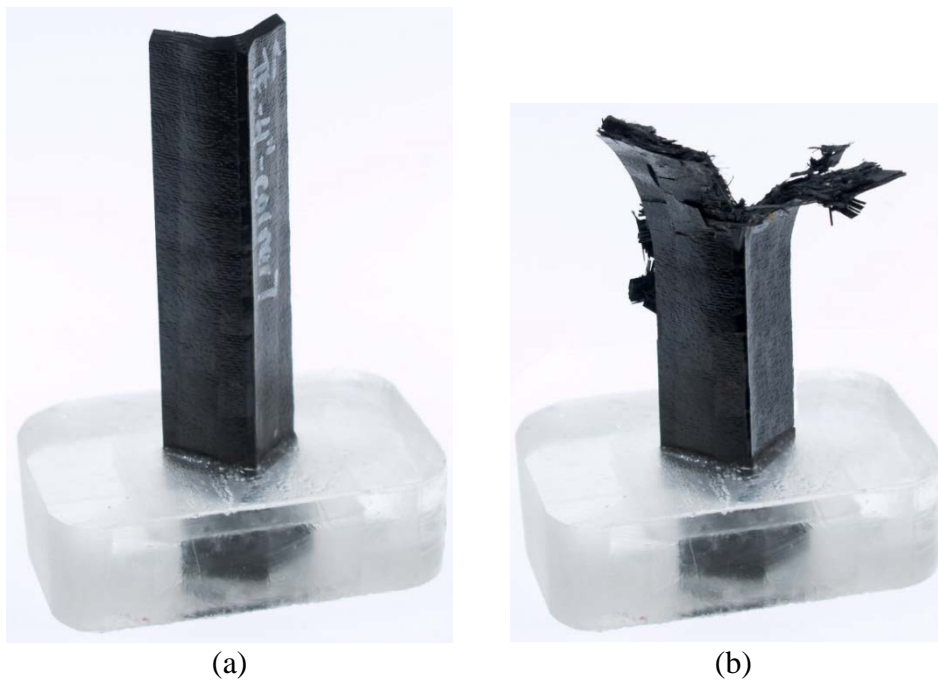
Small corner, specimen IV, (a) before and (b) after crush testing
